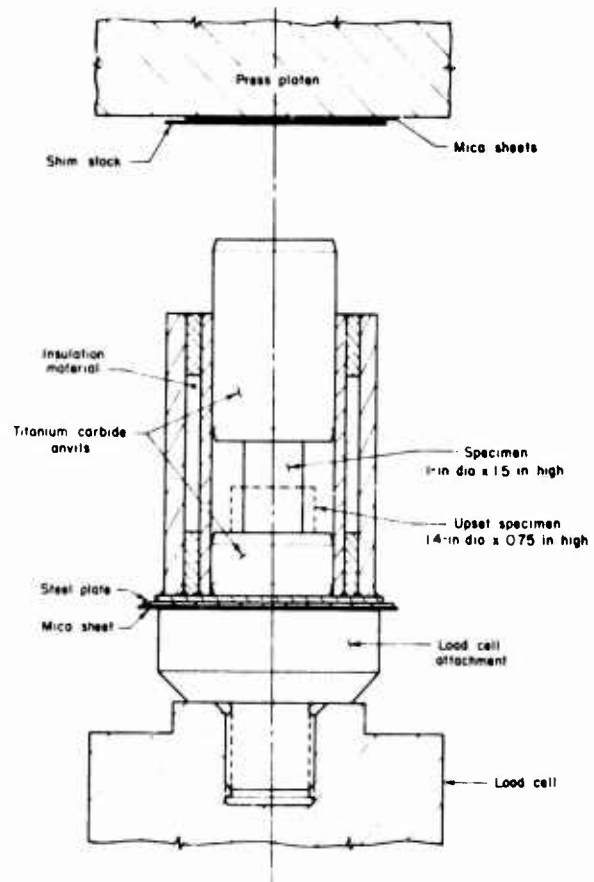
PRESS SETUP AND FIXTURE USED IN HEATING AND ISOTHERMAL UNIFORM UPSETTING OF CYLINDRICAL SAMPLES
